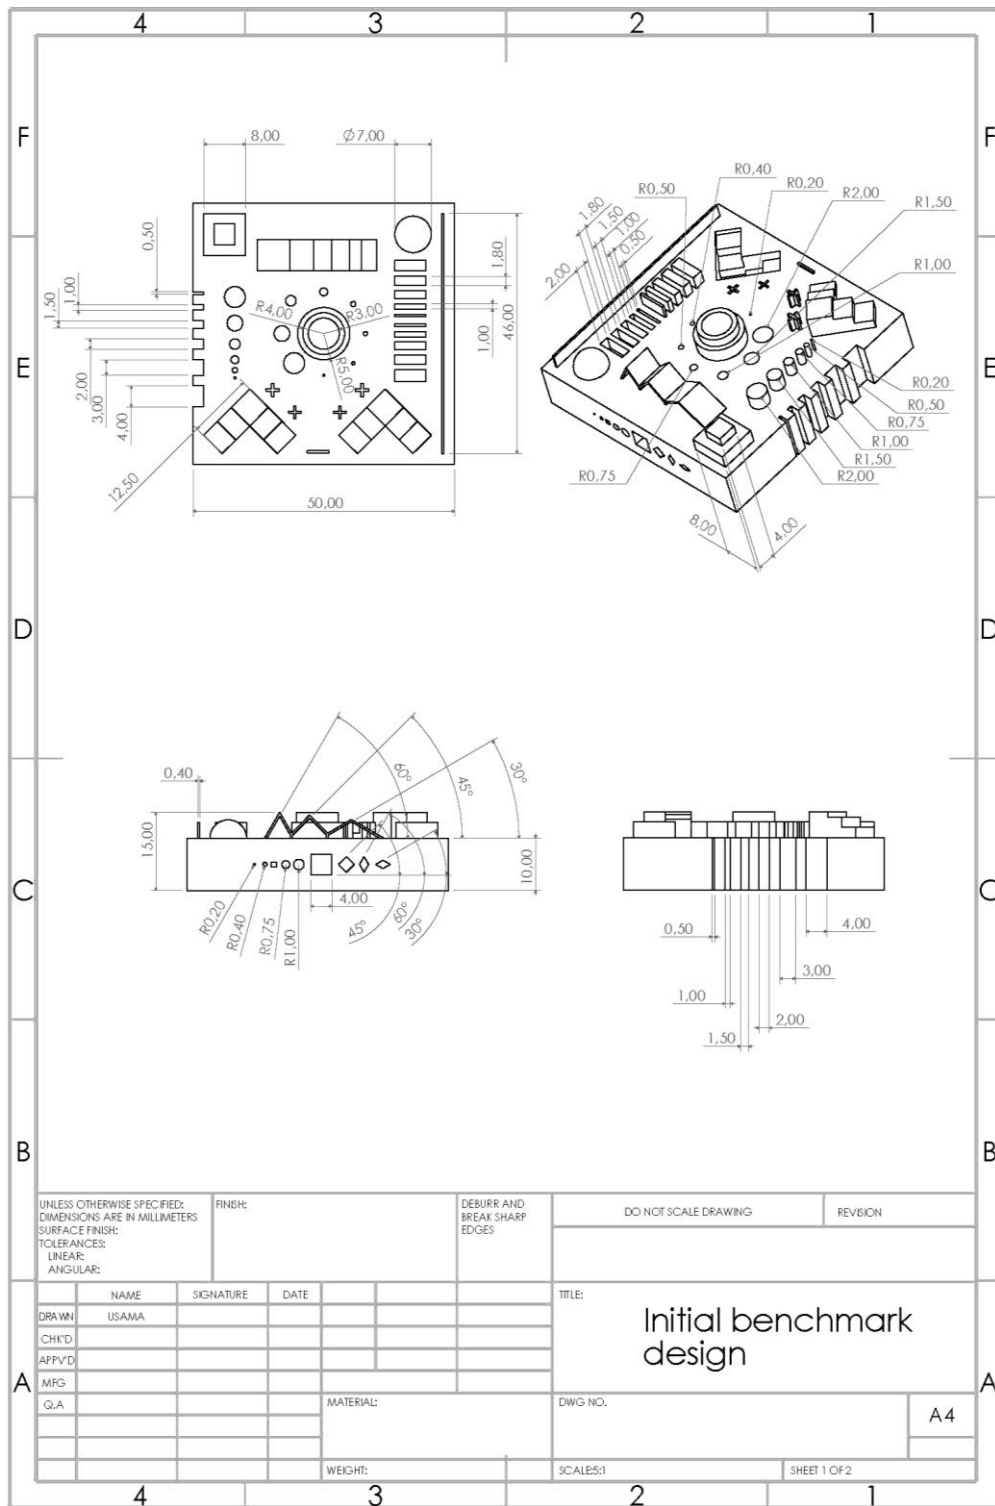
Dimensional drawing of benchmark artifact used for the decision-making process.
